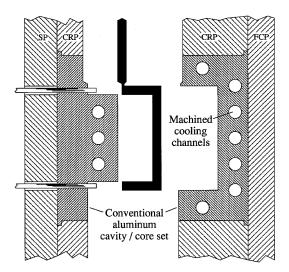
Conventional machined steel or aluminum cavity/core insert set with machined (drilled) cooling channels.
